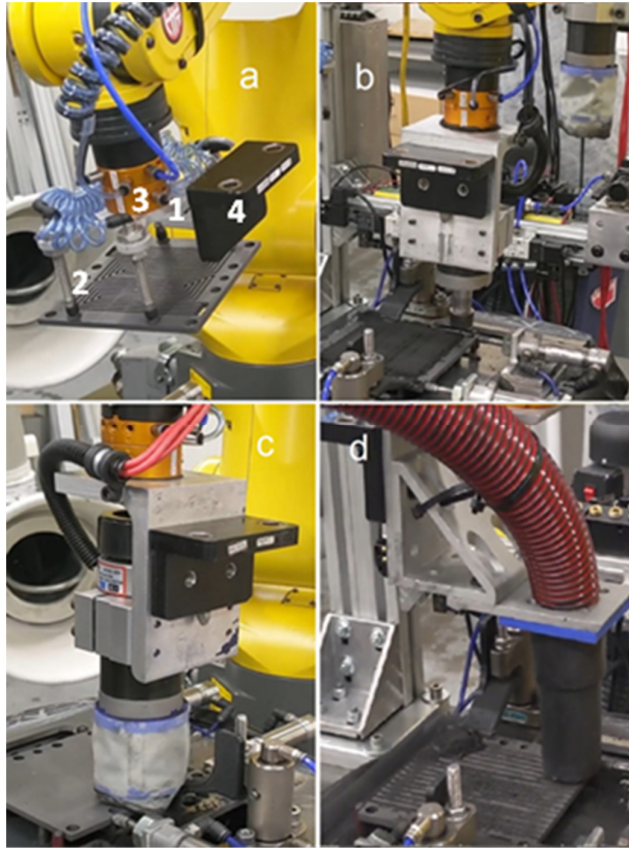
Tooling: (a) Pneumatic gripper shown while handling a graphite plate with machined anode flow field; the numbers indicate: (1) - 1/4"-thick aluminium plate; (2) - level compensators with suspension mechanisms; (3) - tool-side quick connect; (4) - tooling interface plate; (b) spindle with 1/16" end mill shown while machining the anode flow field and manifold holes; (c) spindle with 1/8" end mill and latex skirt shown while machining the cathode flow field; (d) vacuum nozzle loaded to the EOA shown while vacuuming of the cathode flow field.
